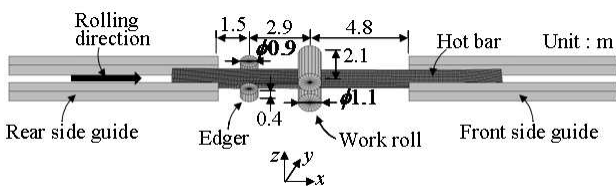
Schematic and dimensions of a hot roughing rolling mill. The side guide can be installed in front of or in rear of the stand
